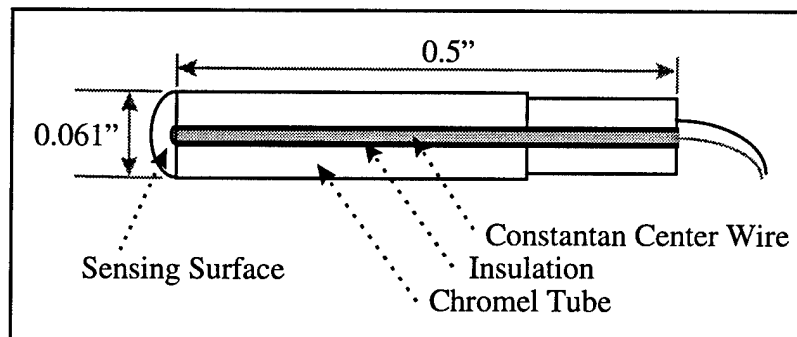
Coaxial Thermocouple – Cutaway View (not to scale)
